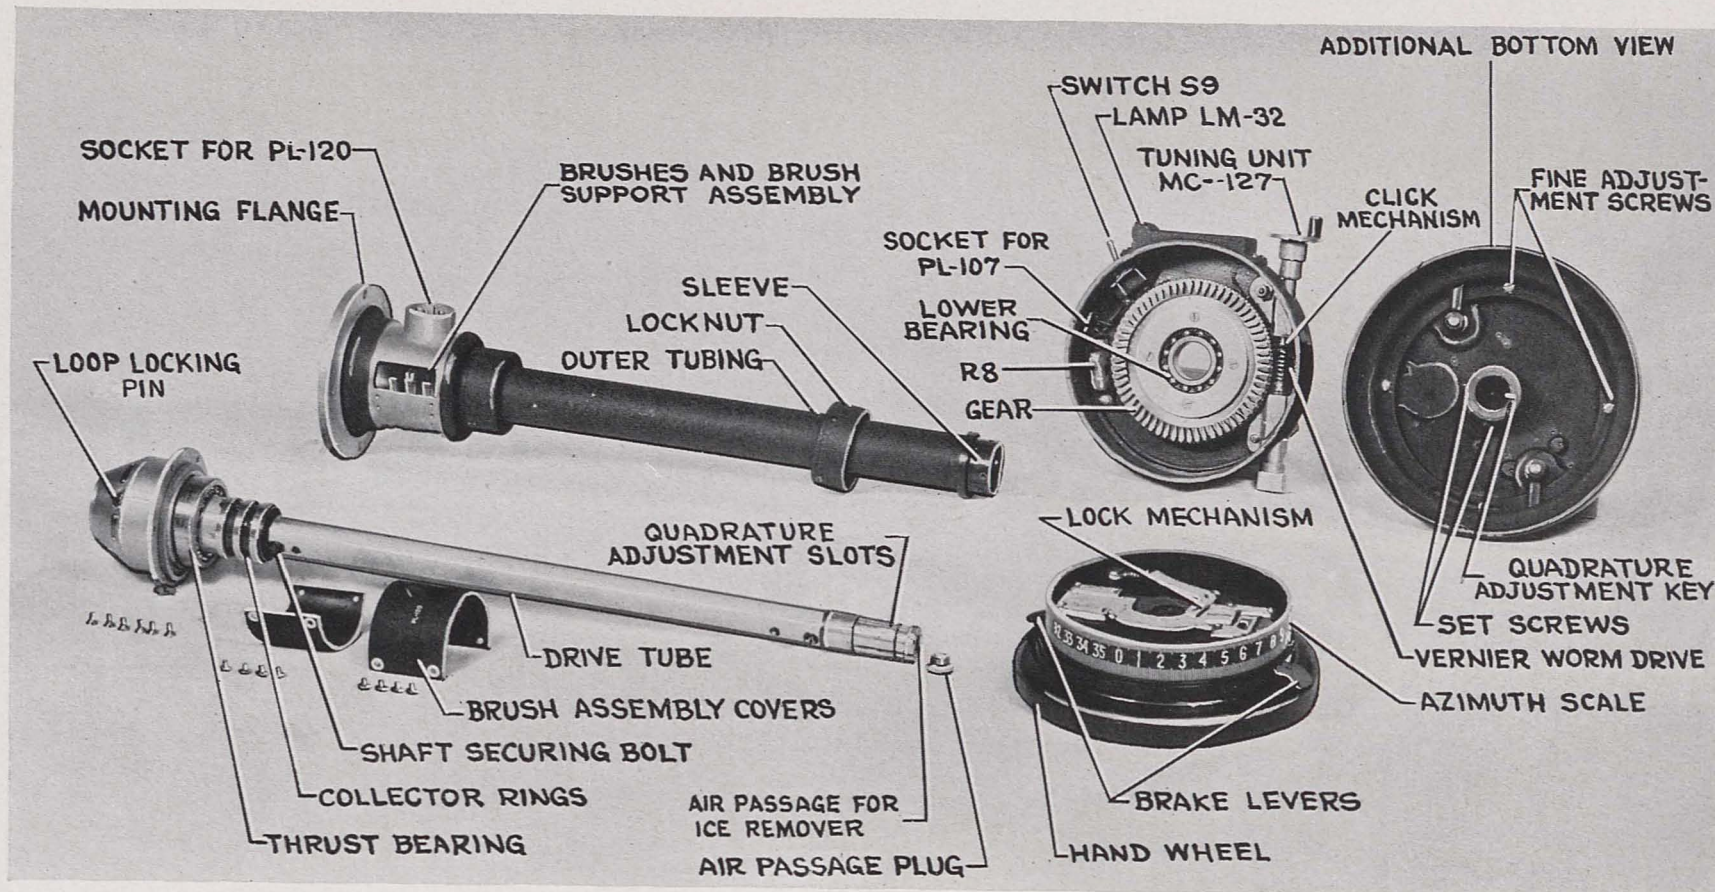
Loop Mounting GS-8-A (Rotatable Loop) Disassembly View
